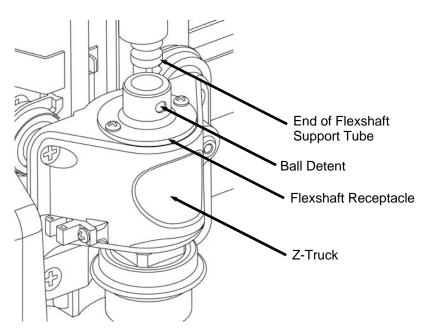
VIEW OF THE FLEXSHAFT CONNECTION TO THE Z-TRUCK
